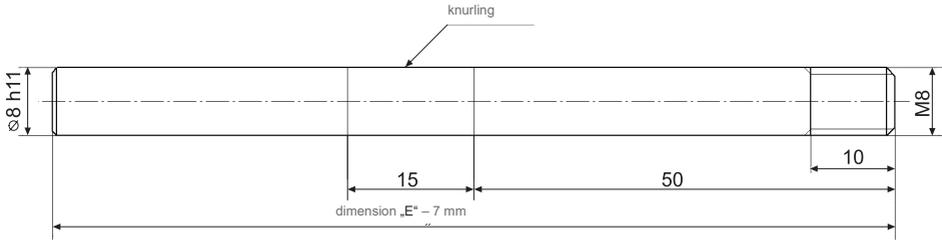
The drawing of the measuring electrode marked with connection thread and knurling
